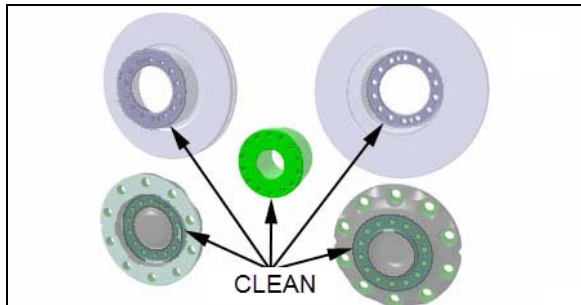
CLEANING HUB BEARING, ROTOR AND HUB FLANGE CLAMPING SURFACES
